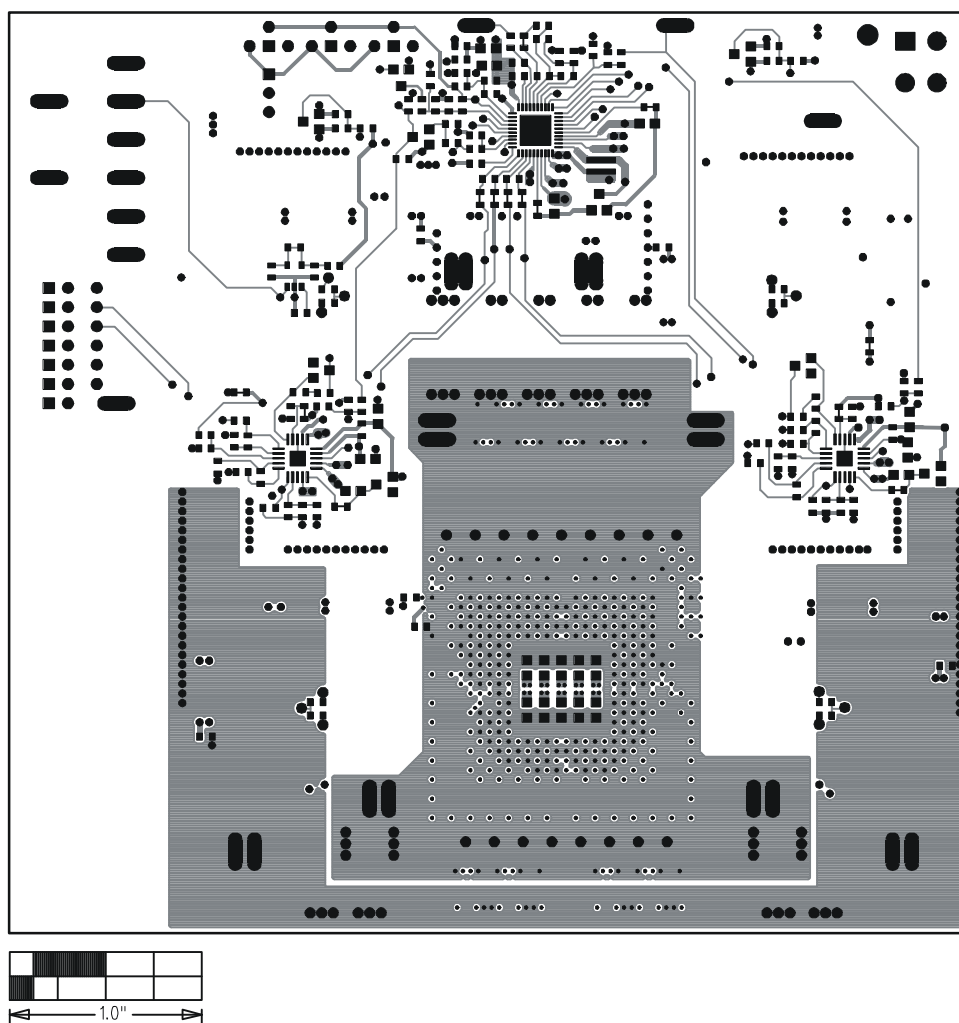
MAX1544/MAX1545 EV Kit PC Board Layout – Bottom Layer
